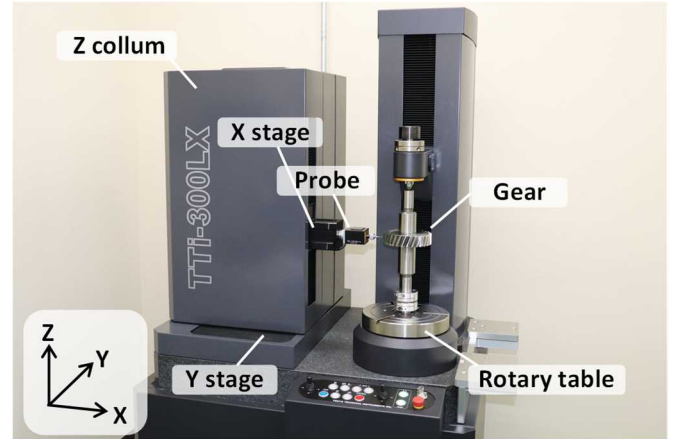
General-purpose gear measuring machine (GMM) developed for the modified line-of-action scanning method
